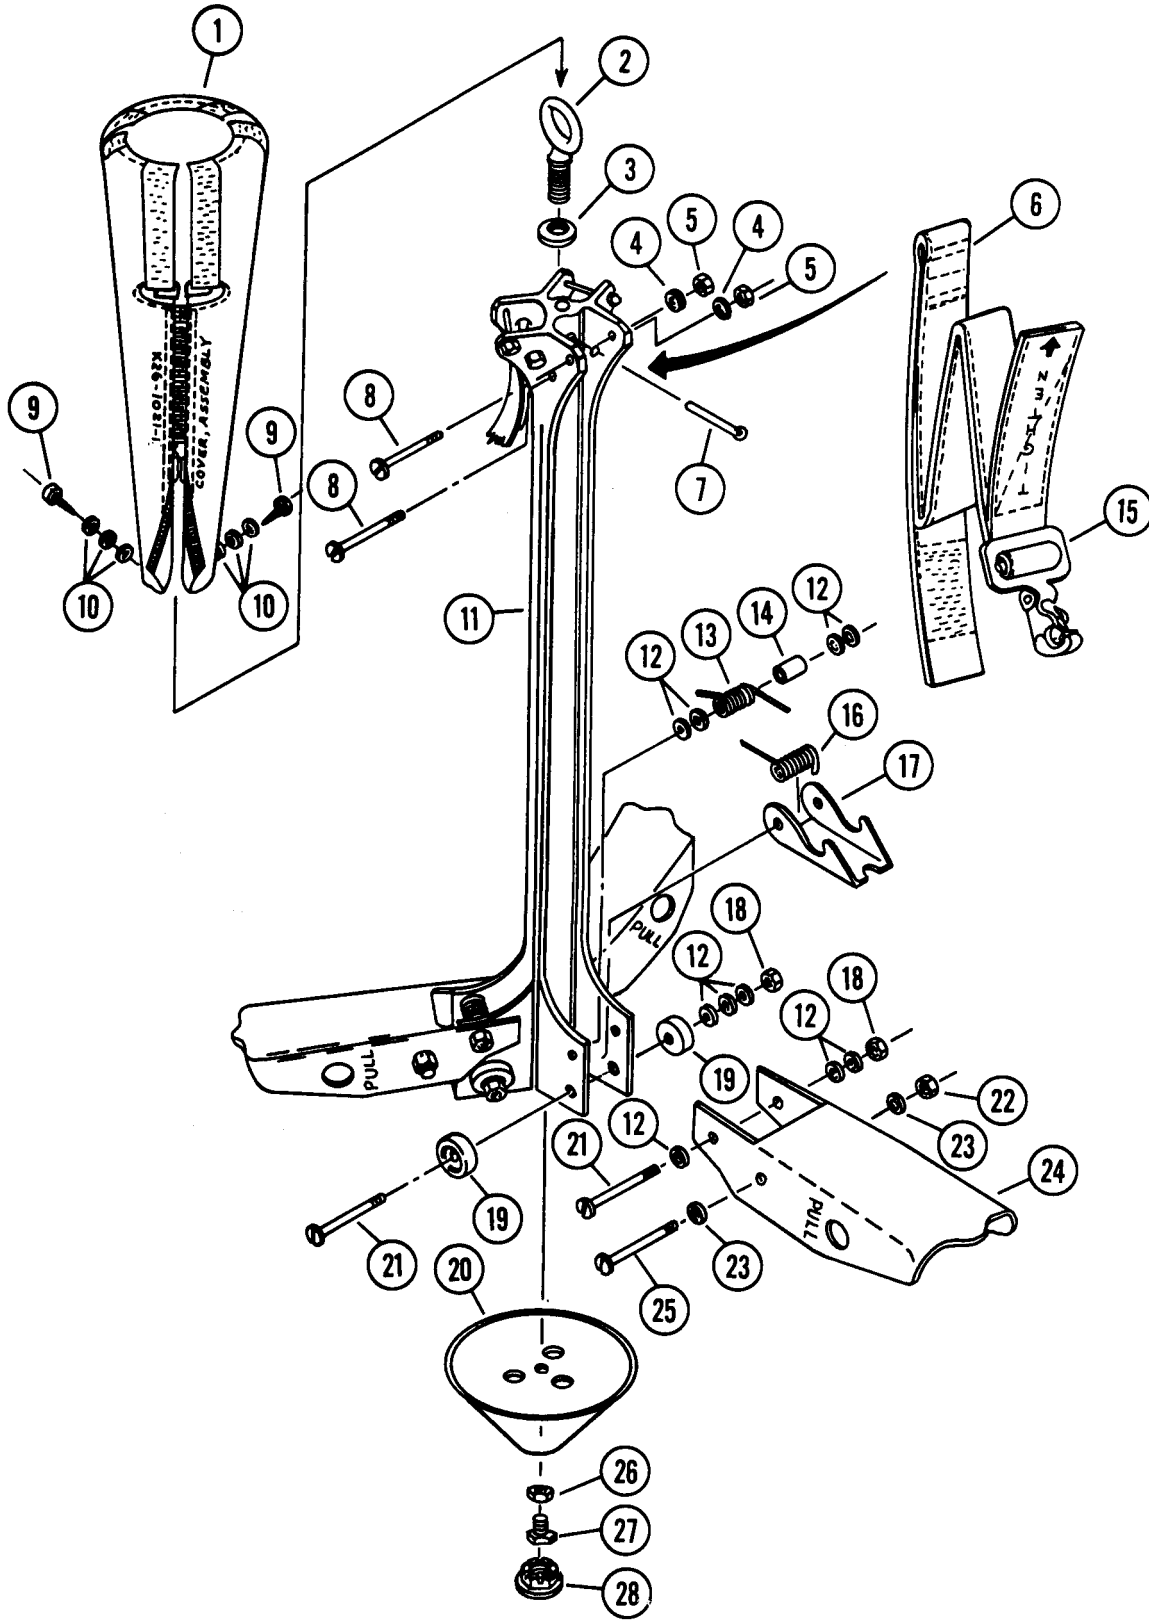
Forest Penetrator Exploded View (Sheet 1 Of 2).
